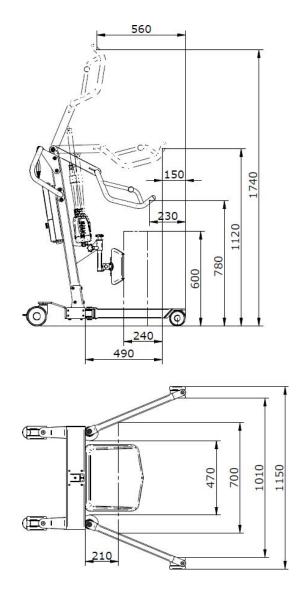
Additional dimensions of the Elevand PowerStand ELS (mm)
